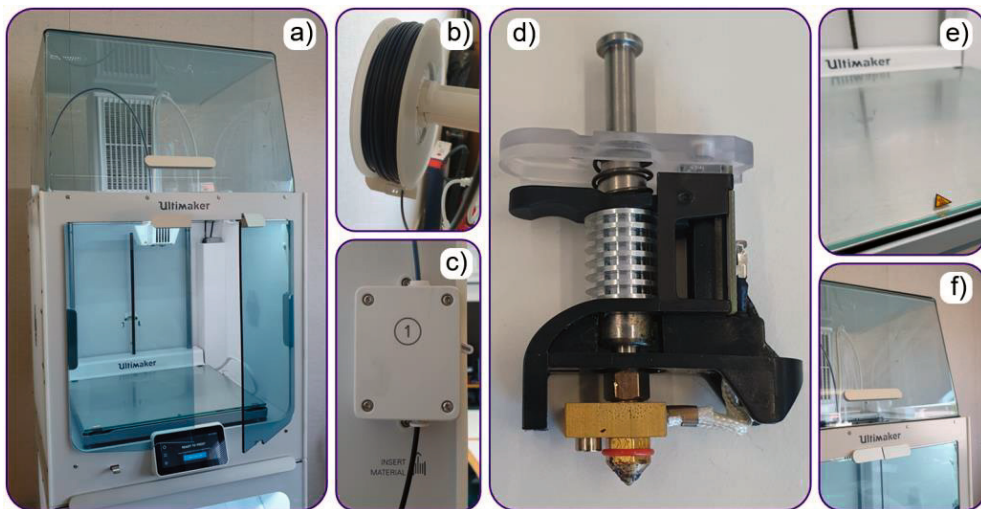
Ultimaker S5 3D-printer and the critical parts that affect the FFF process: a) Ultimaker S5 3D-printer, b) filament spool, c) feeding system, d) print core that includes a heat sink, heater block, and nozzle, e) building plate, and f) chamber.
